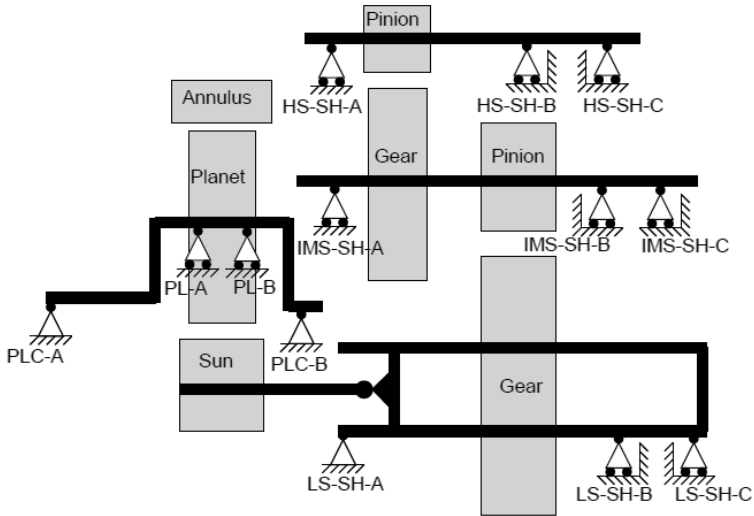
Locations and nomenclature of the bearings in the test gearbox.
